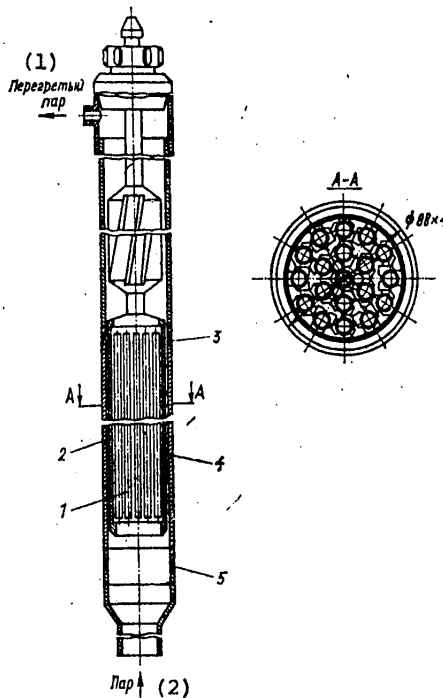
Superheating Channel: 1--fuel assembly; 2--TVS housing; 3--upper adapter; 4--zirconium pipe of channel; 5--lower adapter
